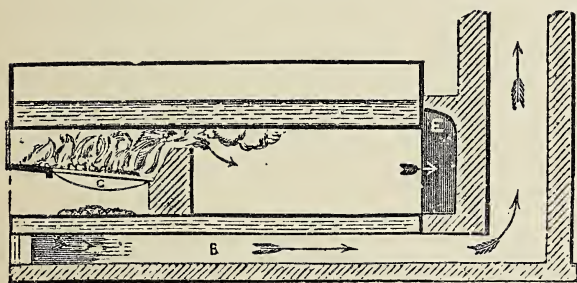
Longitudinal Section of a Cornish Boiler.
